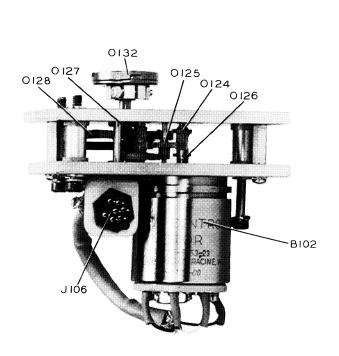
Transceiver 618S-1, Front Panel, Servomotor Drive Assembly, Left Side View
